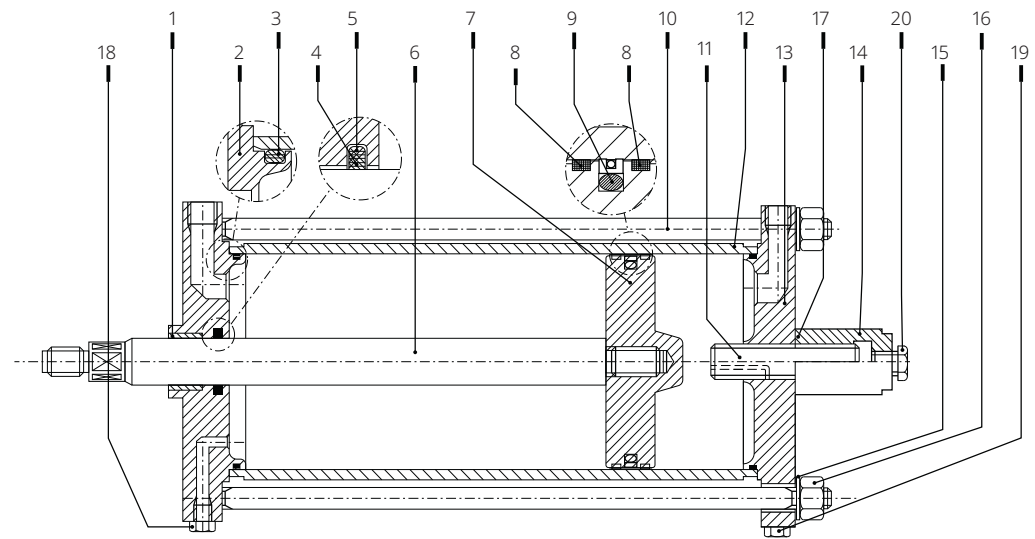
Pneumatic CylinderTable 27. Parts List
